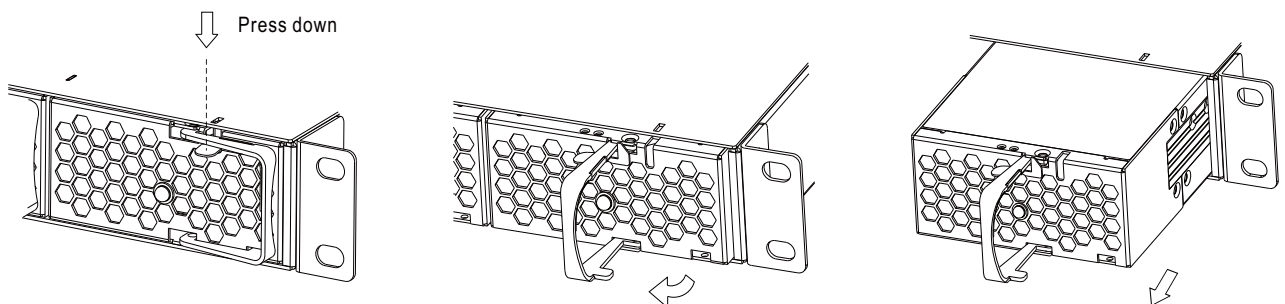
Illustration of how to remove the RCP/RCB-1600 from a rack
